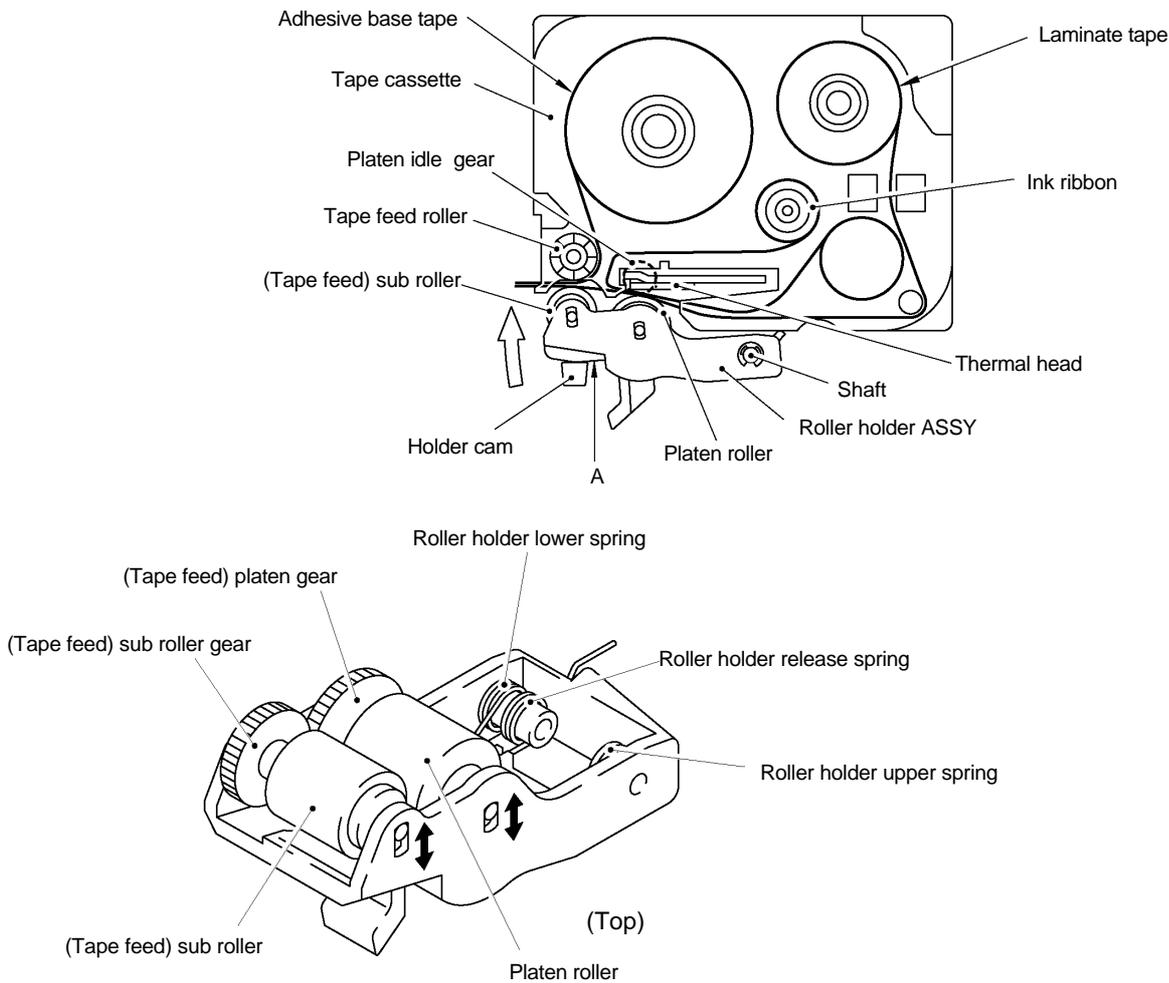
Platen and (Tape Feed) Sub Roller Setting & Retracting Mechanism
